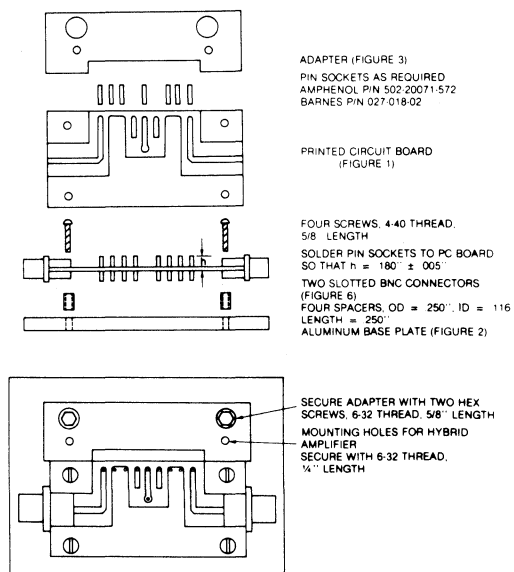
Test Fixture Assembly for Hybrid Amplifiers in Hermetic Package (Case 826-01)
